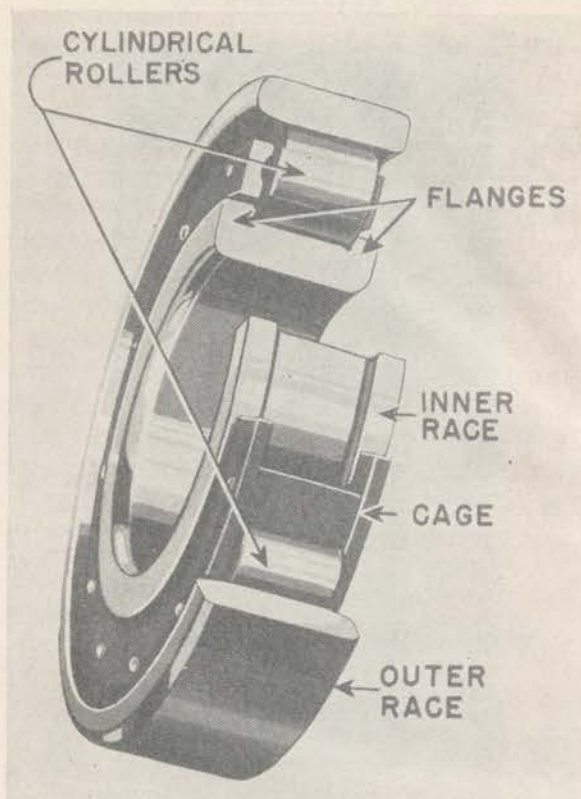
Cylindrical roller bearing with solid rollers.
